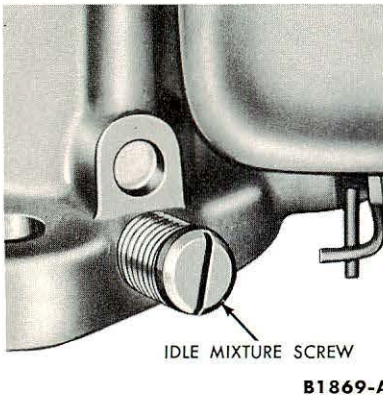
Ford Single-Barrel Idle Fuel Mixture Adjustment
